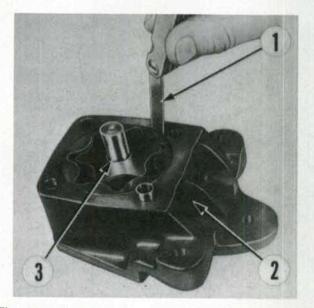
Use a feeler gage (1) to measure clearance between pump housing (2) and rotor assembly (3).
